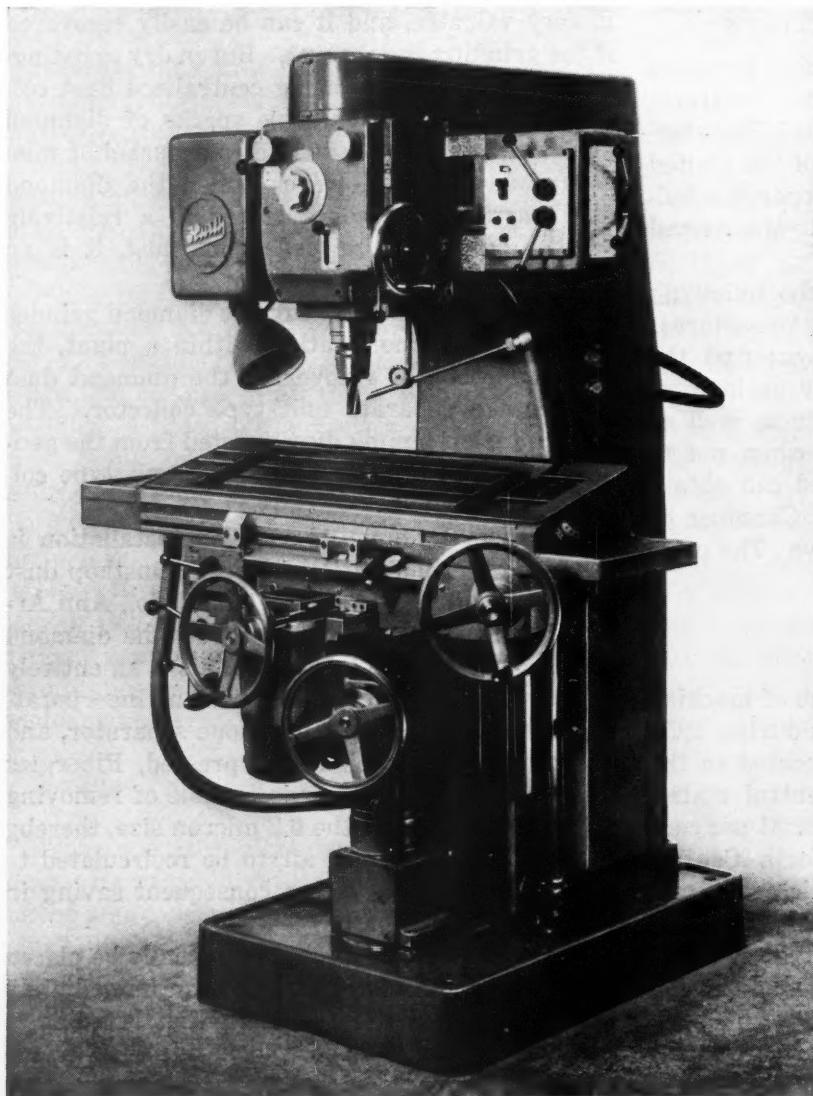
Hurth precision boring and milling machine with tilting work-table. Vertical milling, "down feed" milling, and jig boring can be performed on this machine with a single set-up of the work
